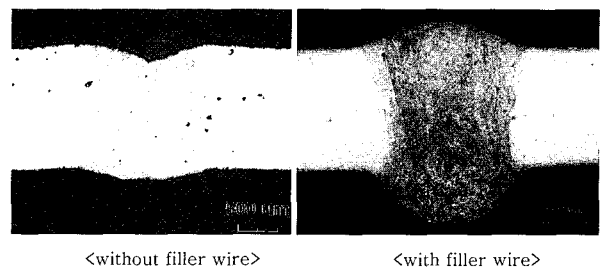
Cross sectional views of weld bead without and with filler wire
